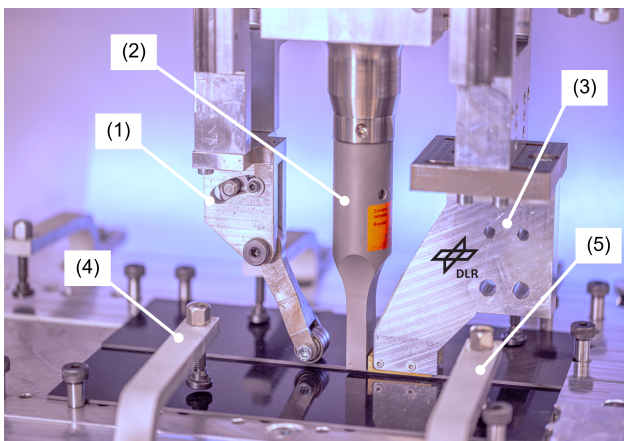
Continuous ultrasonic welding - functional elements and weld setup. Image modified from [24].
